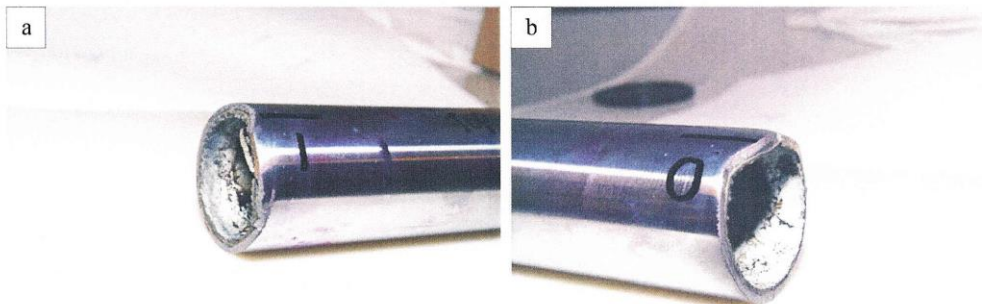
Picture of area close to the fracture surfaces indicates plastic deformation prior to cracking.
